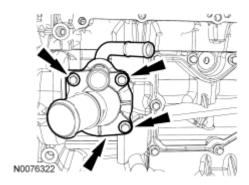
Locating Thermostat Housing, Thermostat And Bolts Courtesy of FORD MOTOR CO.
